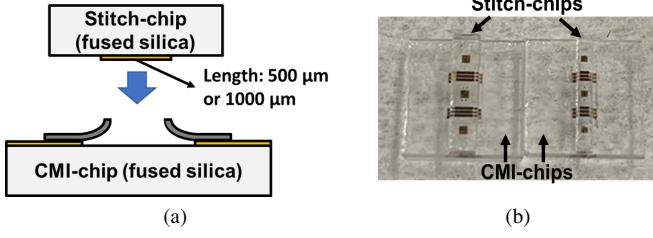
Assembly: (a) flip-chip bonding of the stitch-chip and the CMI-chip and (b) samples after assembly
